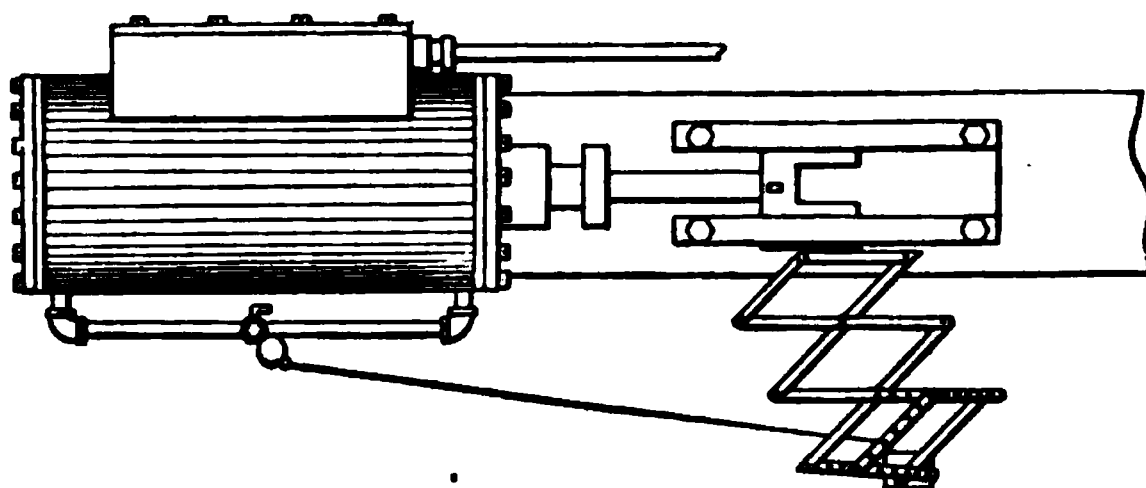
Plan View, Showing Attachment of Pantograph.
